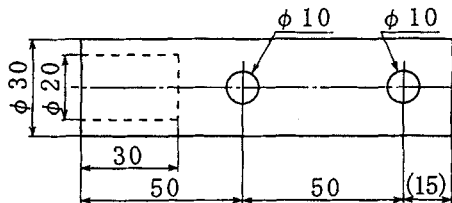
Geometry and dimensions (in mm) of solid and hollow shaft specimens used in experiments.
